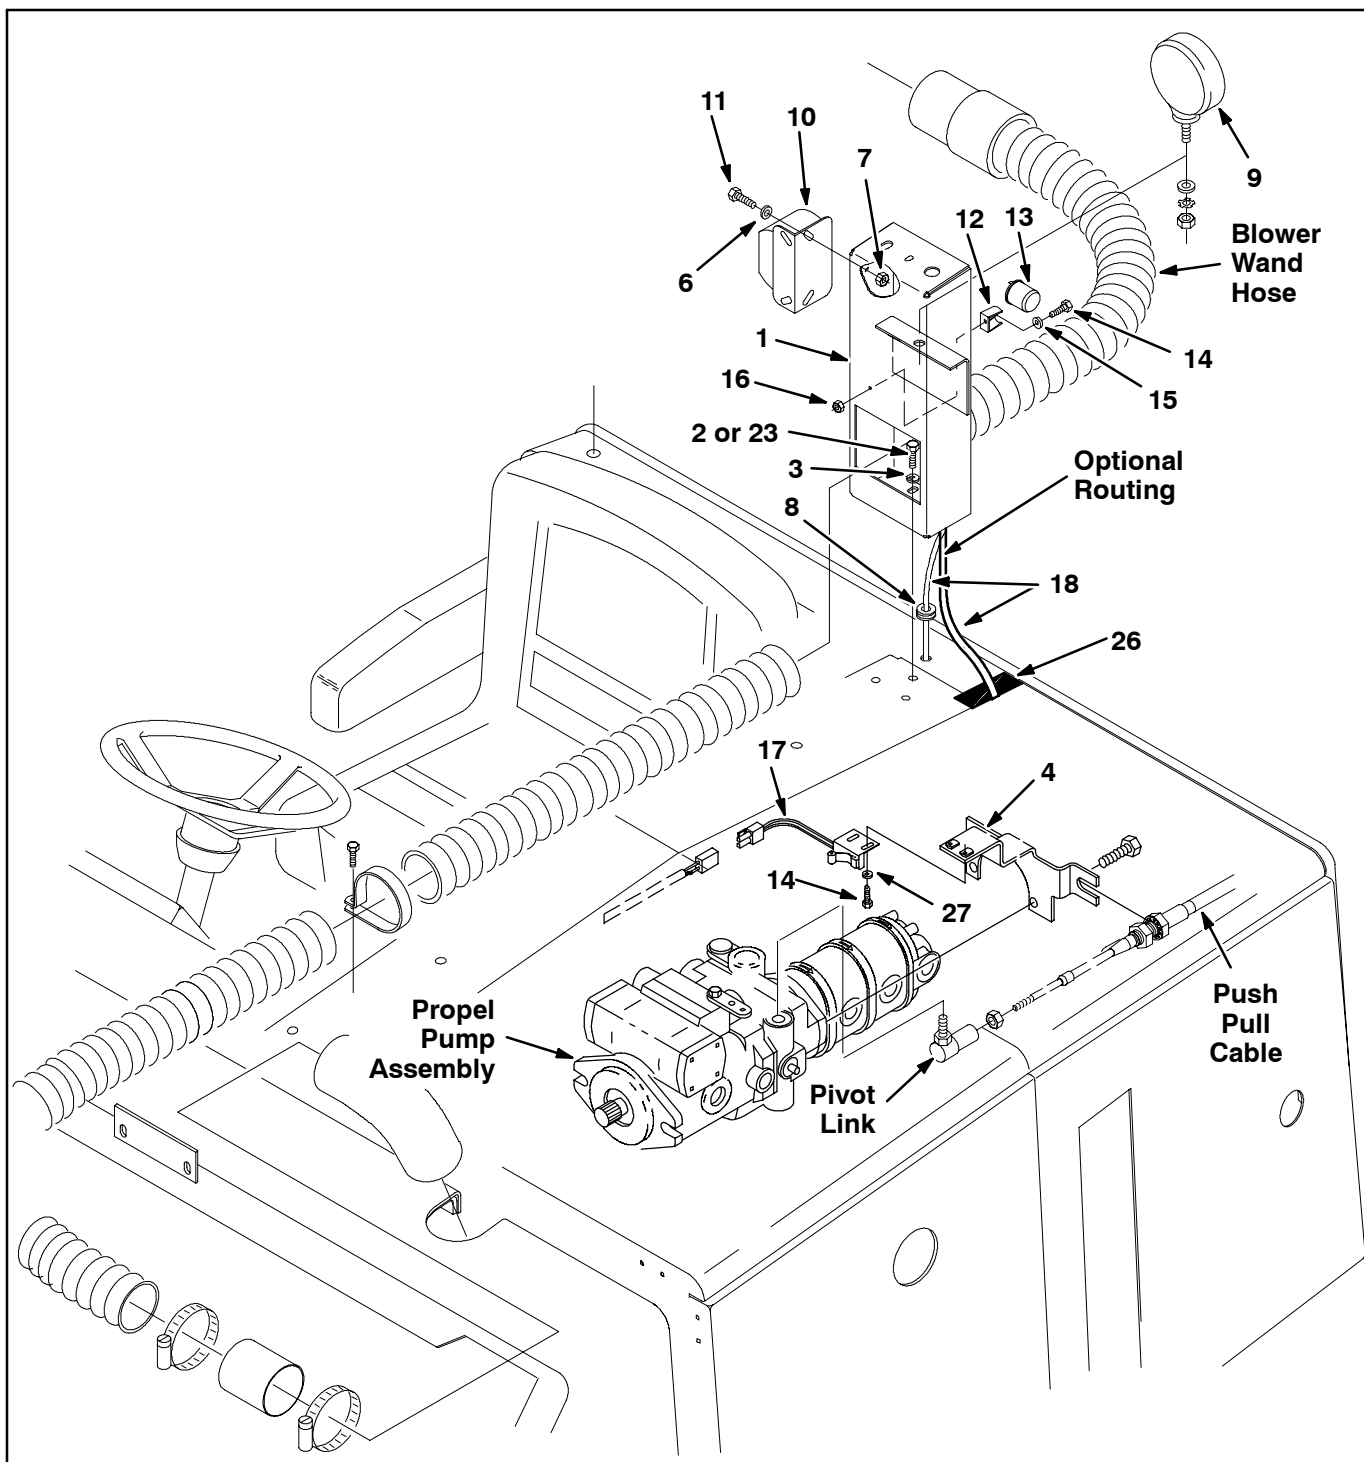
Backup Alarm and Switch Assembly (with Blower Wand Installed)
